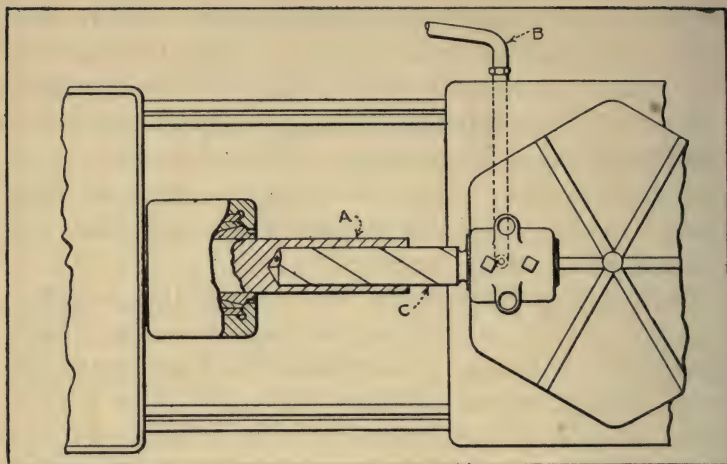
INTERNAL OILING ARRANGEMENT FOR DRILLING ON A HORIZONTAL TURRET LATHE
